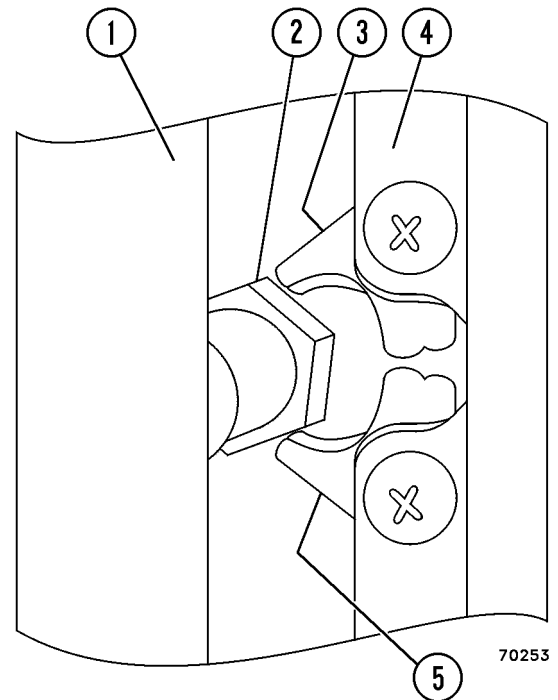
DOOR JAMB BOLT ADJUSTMENT
